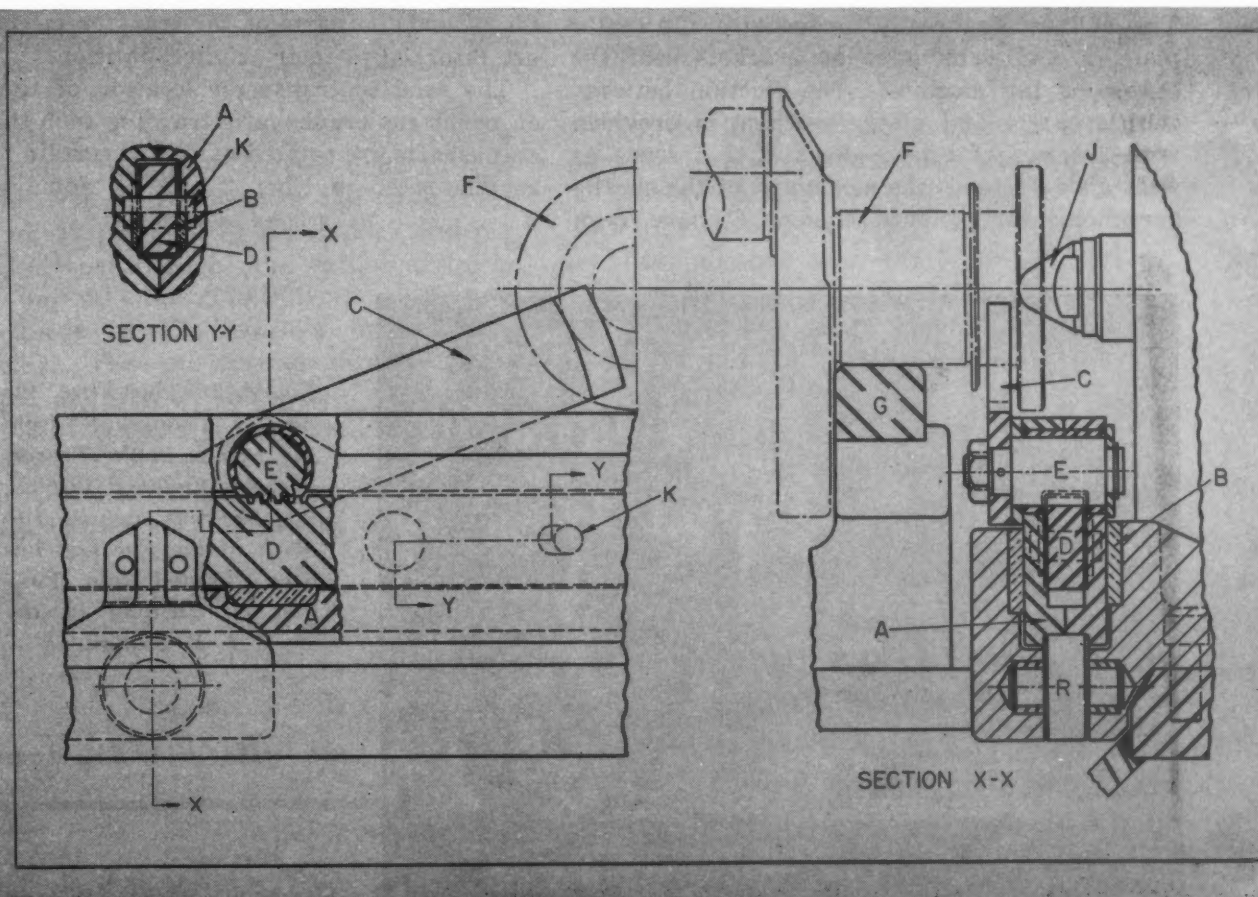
(Below) Sectional Views of Part of the Transfer Mechanism Used on the Automotive Crankshaft Drilling Machine
